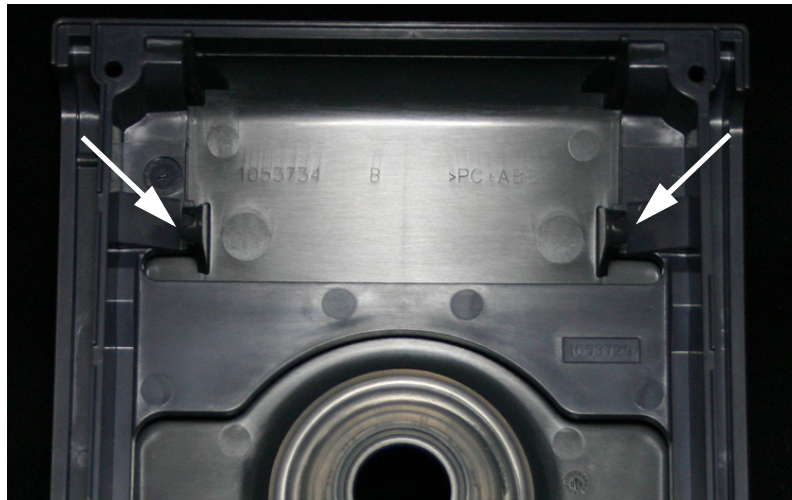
FLIP LID ASSEMBLY REMOVAL
